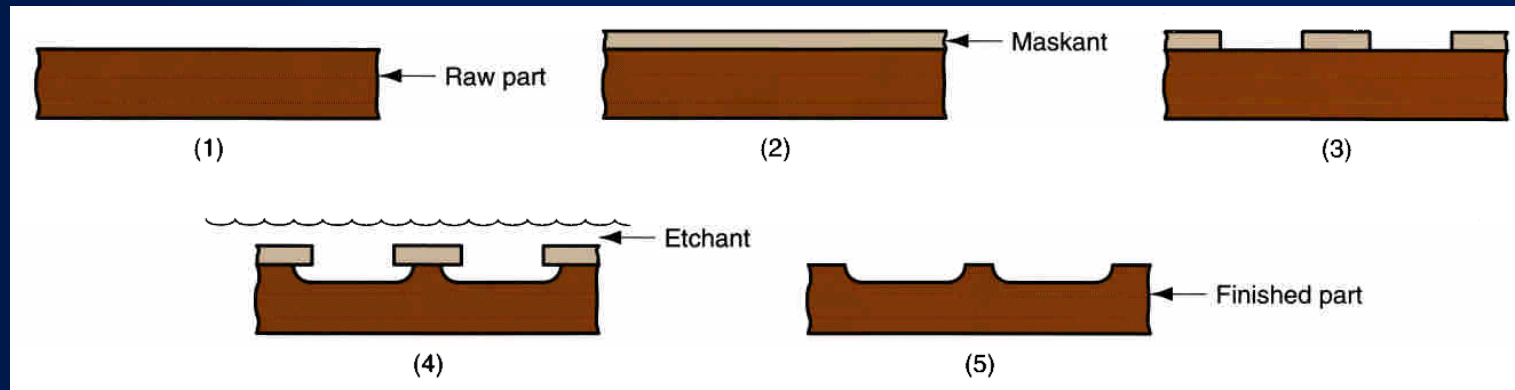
Sequence of processing steps in chemical milling: (1) clean raw part, (2) apply maskant, (3) scribe, cut, and peel the maskant from areas to be etched, (4) etch, and (5) remove maskant and clean to yield finished part
